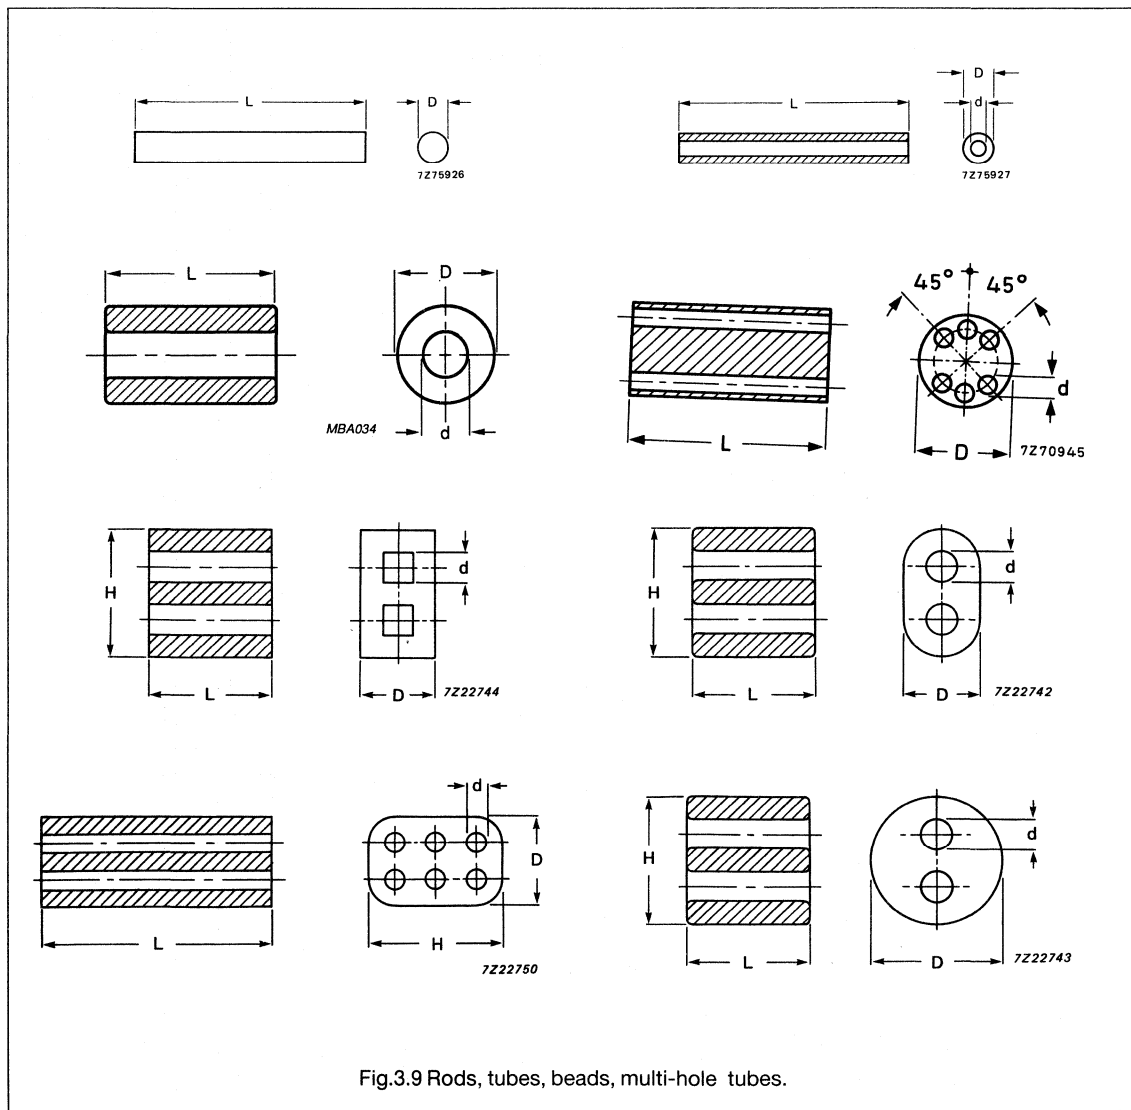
Rods, tubes, beads, multi-hole tubes.
